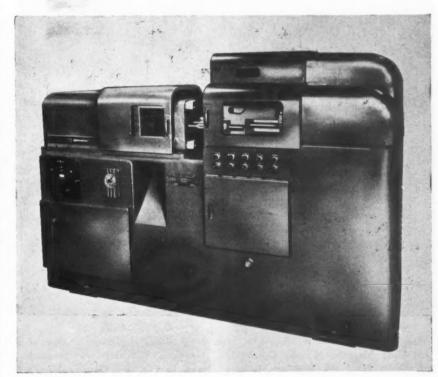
Front View of Fellows-Leominster Injection Molding Machine Built by Plastics Division of Fellows Gear Shaper Co.
